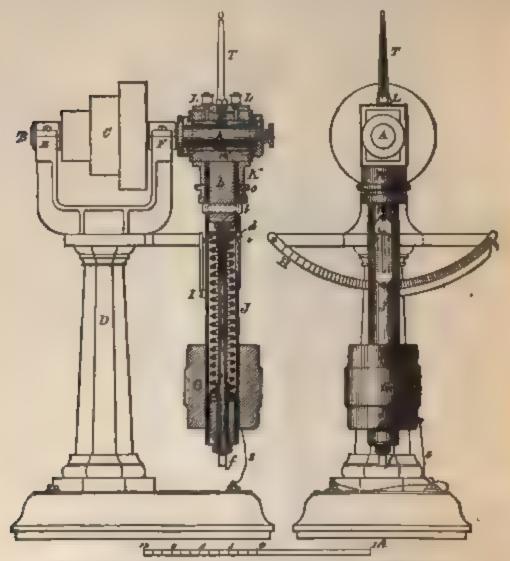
SECTION OF RAILROAD LUBRICANT TESTING-MACHINE.
